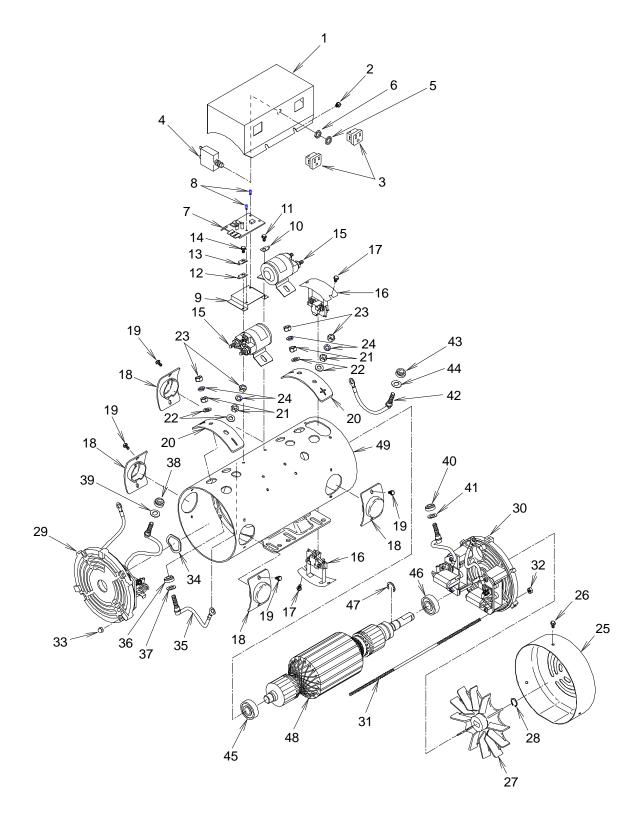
12-Volt Large Frame Generator, Interim Version, continued
